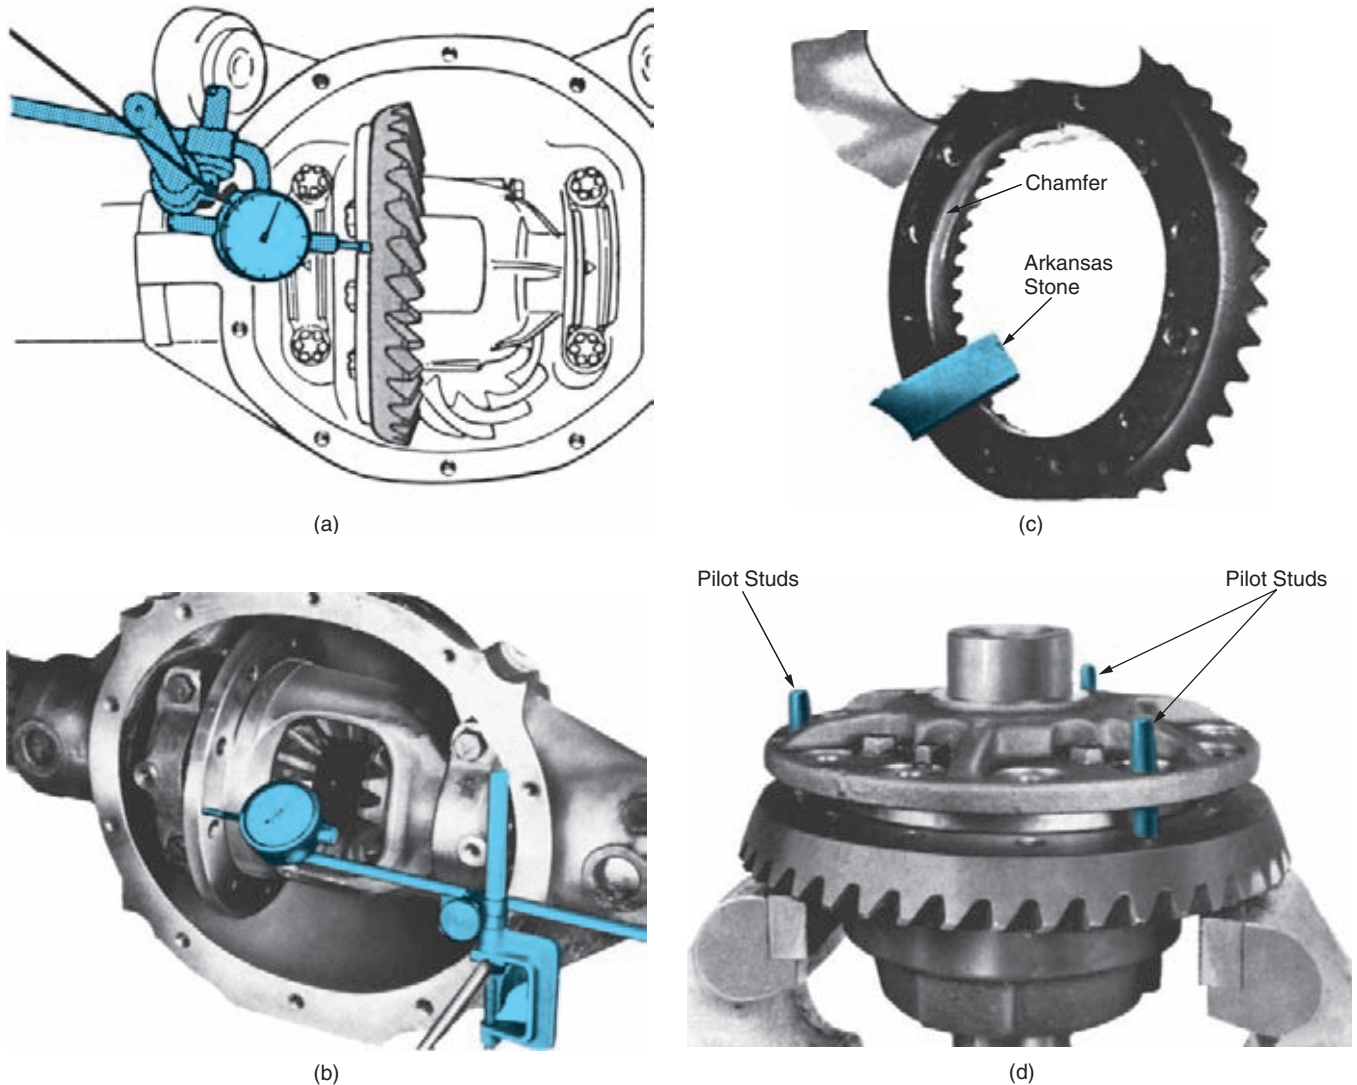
A dial indicator has been set up to measure ring gear runout (a). Among other things, excessive runout can be caused by runout of the ring gear mounting flange (b). When replacing a ring gear on the case, be sure to remove any burrs that might interfere with the seating (c) and to use pilot studs for bolt alignment (d). (a is courtesy of Ford Motor Company; b, c, and d are courtesy of DaimlerChrysler Corporation)
